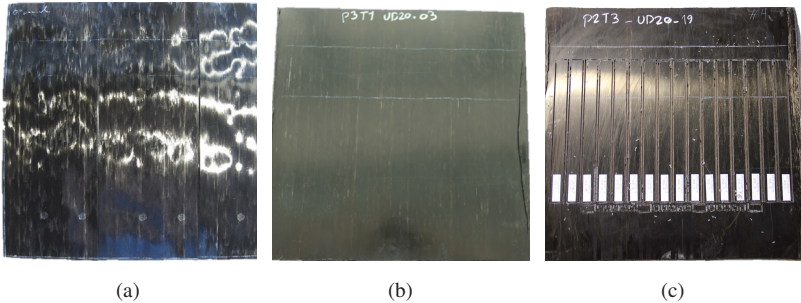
Sample manufacturing steps: (a) tape lay-up with PTFE sheet, (b) consolidated plaque, (c) CNC-machined specimen in consolidated plaque
